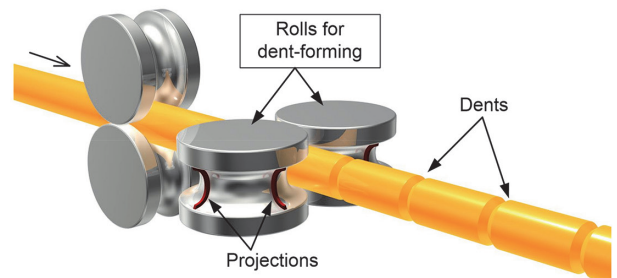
Schematic drawing of dent forming process on pipe surface³⁾
